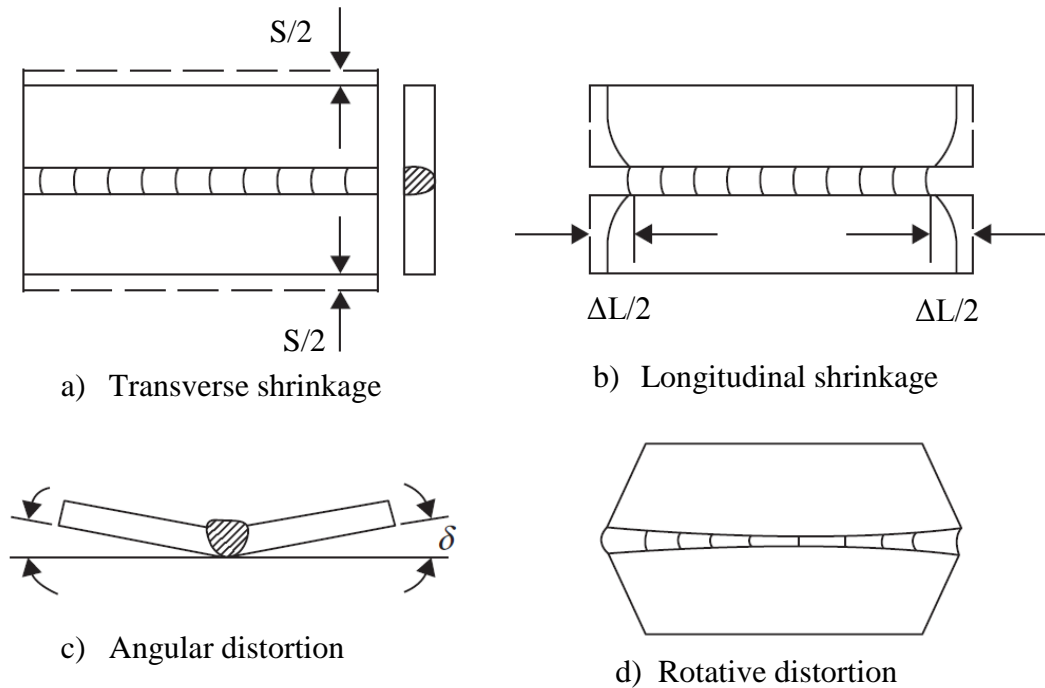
Fundamental dimensional changes that occur in welds [4]
